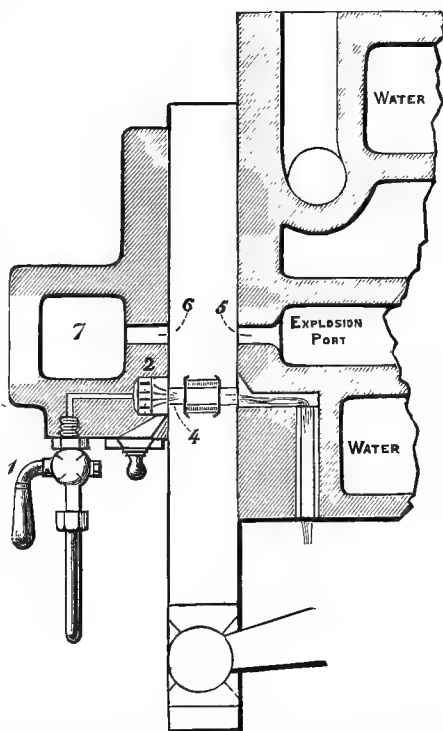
Sectional plan, Clerk incandescent platinum igniting valve
